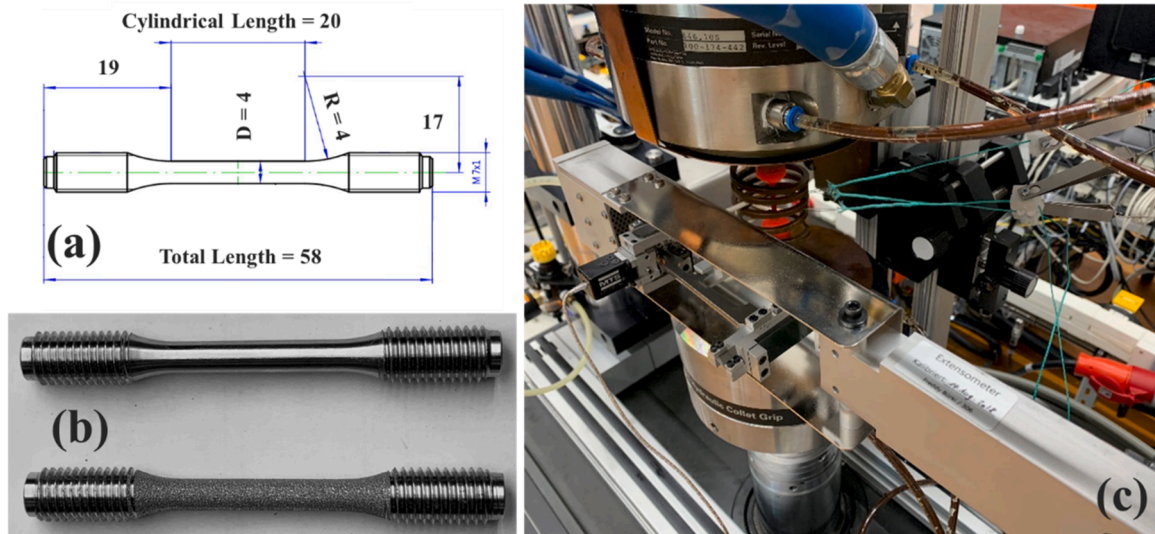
(a) Specimen drawing for mechanical testing (dimensions in mm), (b) Samples with as-built and machined surfaces, (c) Employed mechanical testing setup.
